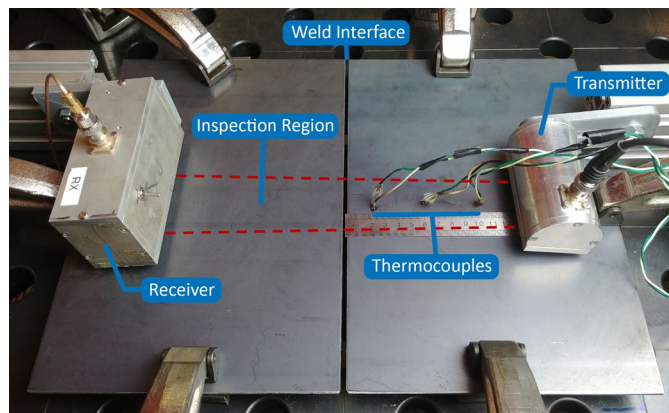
In-process non-contact ultrasonic inspection set-up; the transmitting and receiving transducers are located on either side of the weld interface with the inspection region shown between the dashed lines; the three permanently welded thermocouples are located in the inspection region at a distance of 20mm, 60mm and 100mm from the weld interface.
